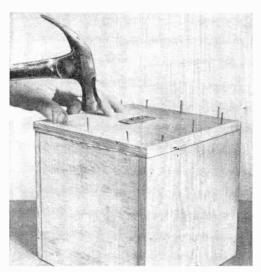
Mount screw-type terminal strip to rear of cabinet; then glue and nail rear wall to cabinet shell, trueing up sides, top, and bottom as you go.
